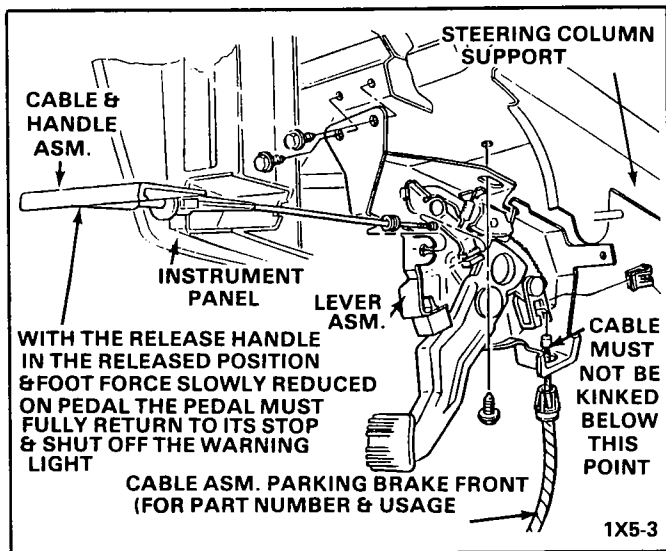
Parking Brake Release Handle & Control Assembly-A Carline
